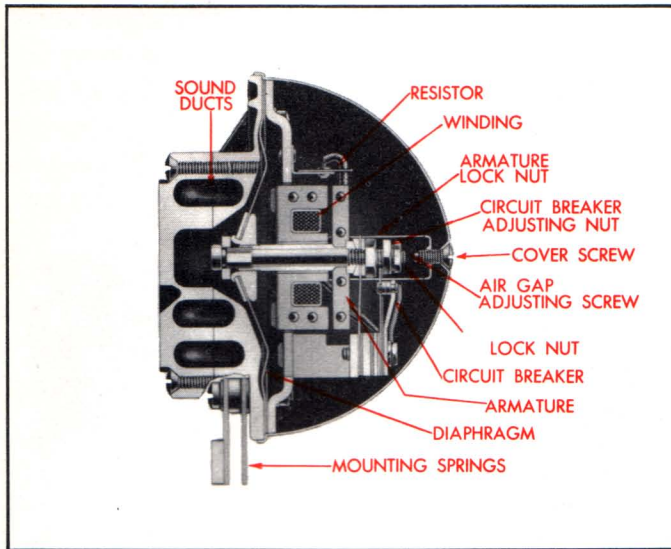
HORN ADJUSTMENTS (TYPES HB, HC, HF, AND HG). Adjustment of the armature air gap is made by loosening the lock nut and turning the adjusting bolt. The current draw is adjusted by loosening the lock nut and turning the large adjusting nut.
